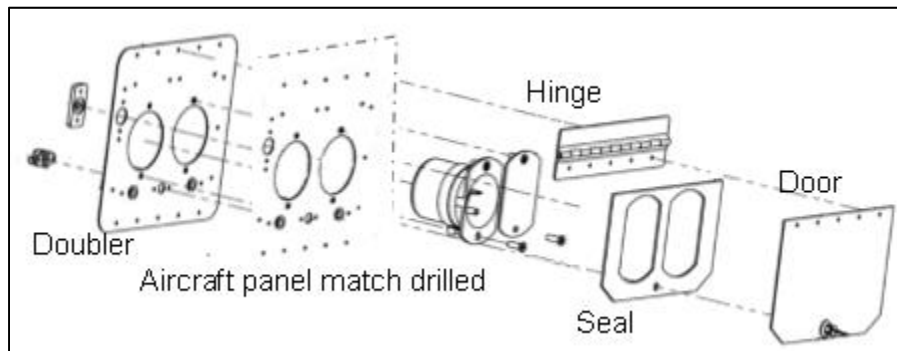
TD02959 Door Kit layout shown above is field fabricated and installed with reference to drawings 02959 and 03141, and instructions TN02070 and TN03039.
